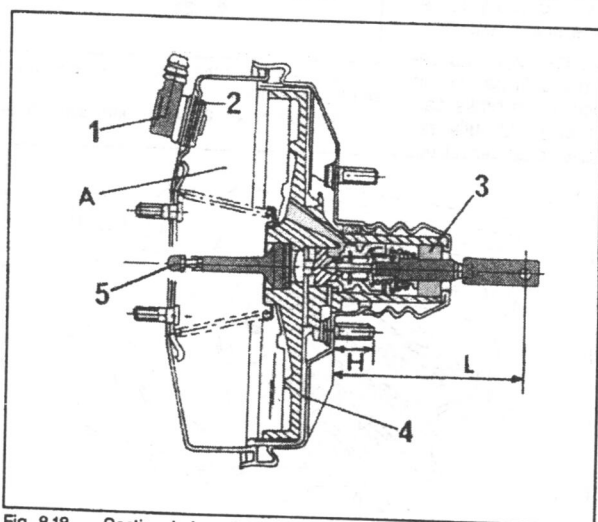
Sectional view of the brake servo unit with one working chamber (A). Units with 8 and 9 in. in diameter look similar.
